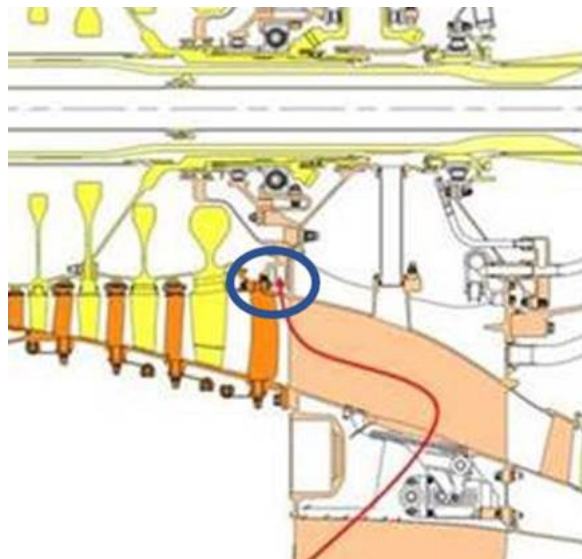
Trace showing how oil from Bearing No. 3 could seep through the components and settle in the bypass cowling. (reference Appendix1)
